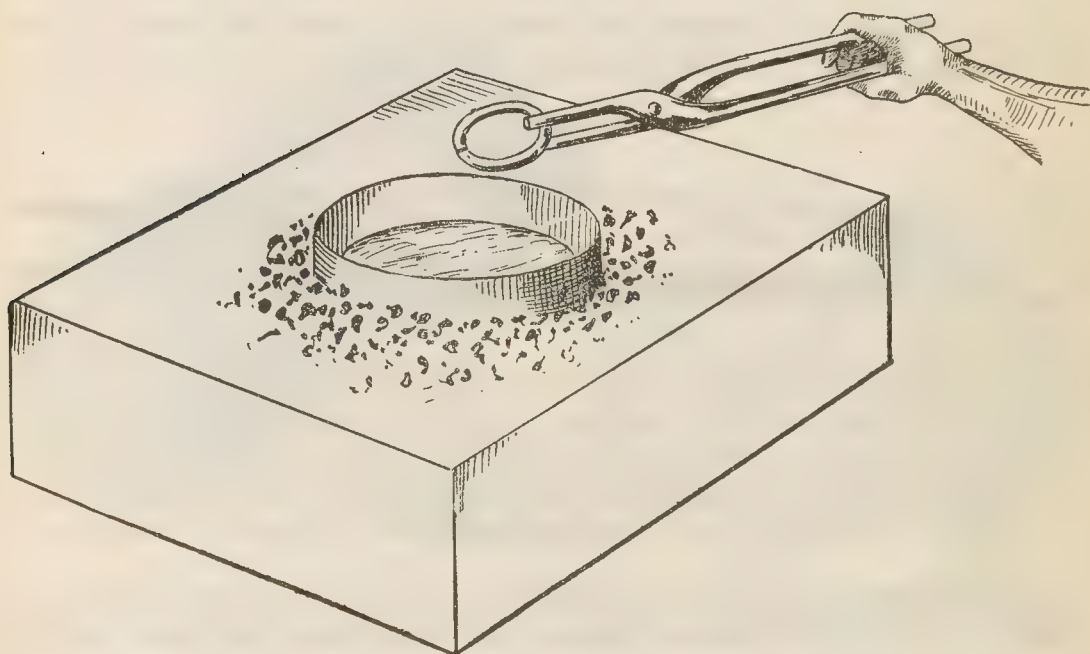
,984.—Brazing by immersion or dipping. The brazing solder is melted in a pot on the coal fire, as shown, or better in a gas furnace, flux being placed on top of the solder. *In brazing*, hold the object first in the flux a little while to heat and coat the article with a film of flux. Then, when it is lowered into the solder, the latter will flow in the joint and firmly attach itself. Before dipping, the article to be brazed is coated with a special anti-flux graphite, covering all the surface except that which is to be brazed. The layer of flux in the pot may be kept from $\frac{1}{2}$ inch to 2 inches deep.
